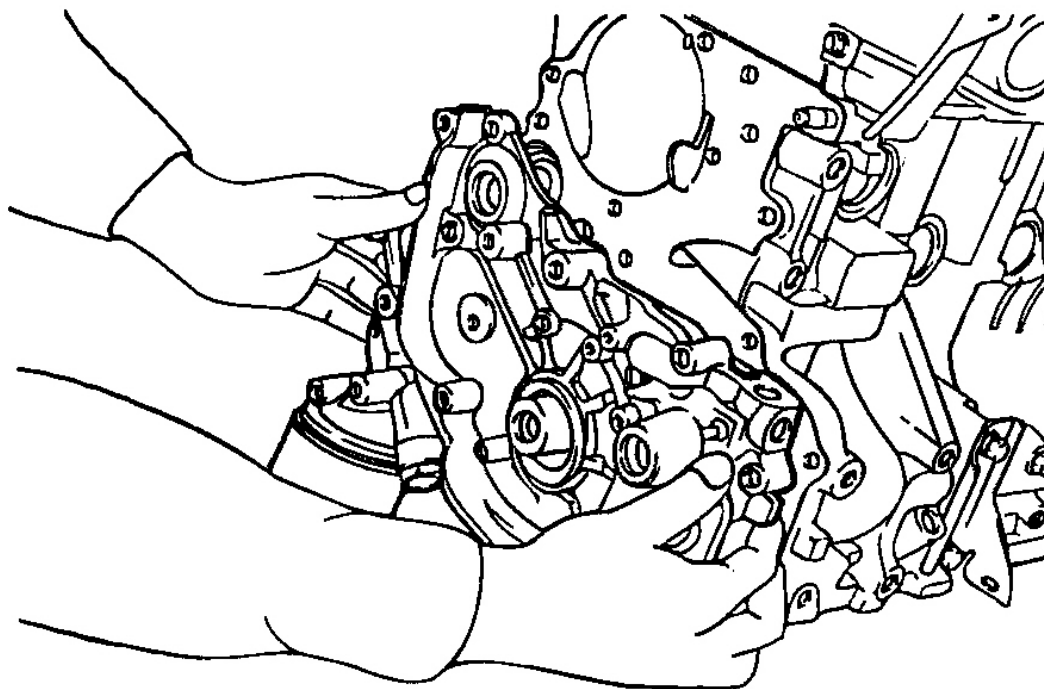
Installing Front Crankshaft Oil Seal
